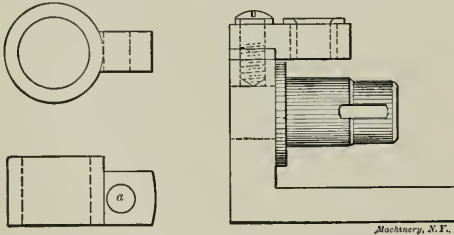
Piece to be Drilled and Jig Used for this Work.
